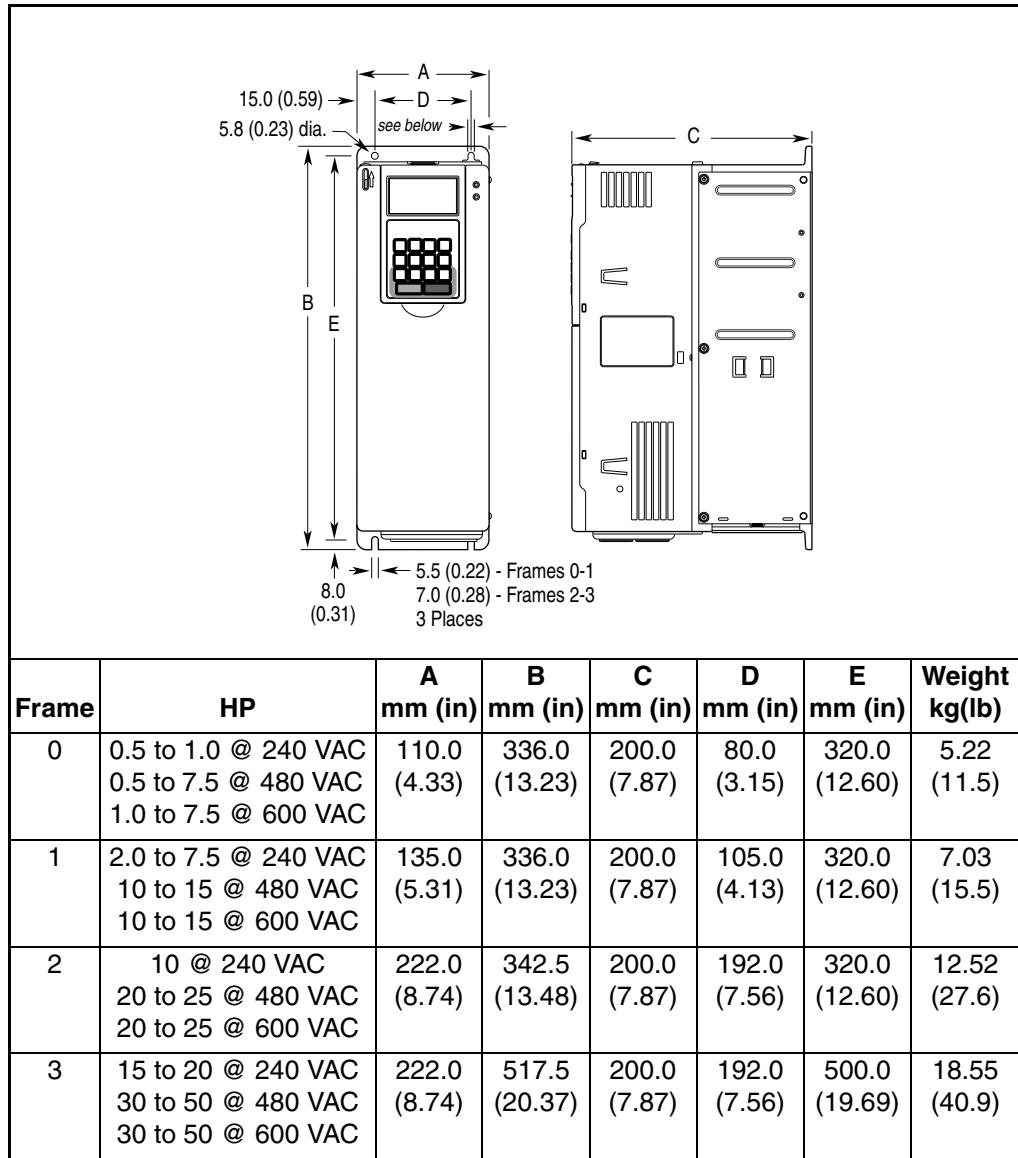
GV6000 Drive Dimensions Frames 0 - 3
